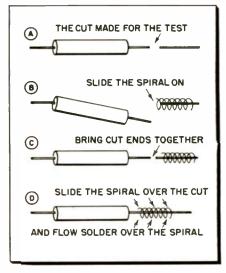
After a lead is cut and component tested, slide a tight fitting tinned wire spiral over both ends, centering spiral over cut. Crimp spiral ends and solder.
